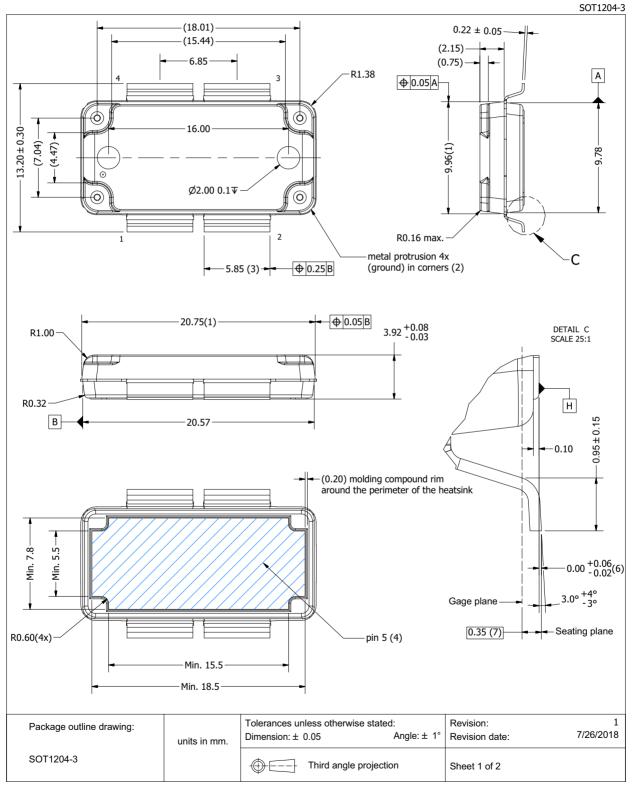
Package outline SOT1204-3 (sheet 1 of 2)
